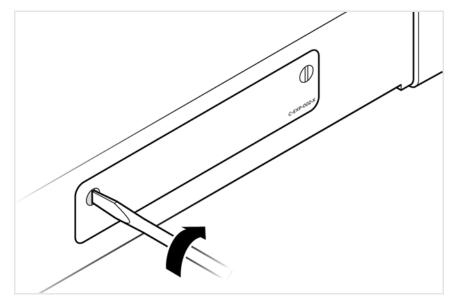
Replace Retaining Screws in Blank Panel and Tighten
